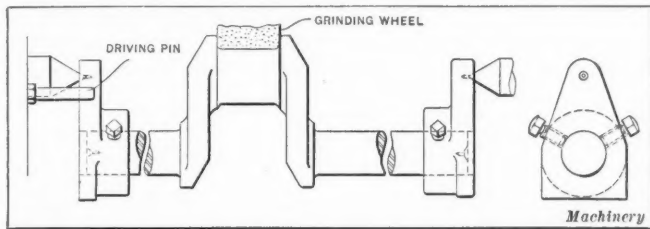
Method of holding and driving a One-throw Crankshaft when grinding Crankpin
